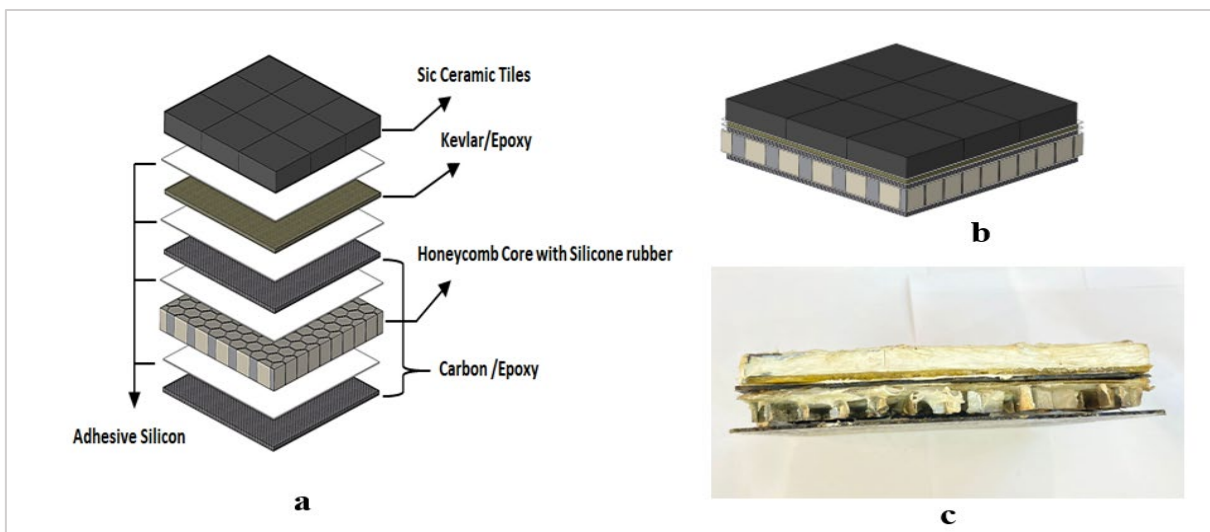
Hybrid sandwich body armor (third sample S3) after assembly and fabrication: (a) Schematic of arrangement of layers (b) Schematic of Isometric view (c) Photograph of Side view
